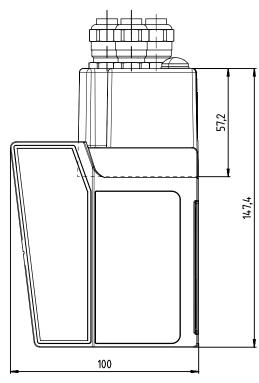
Dimensioned drawing BPS with MK 301 connection hood
